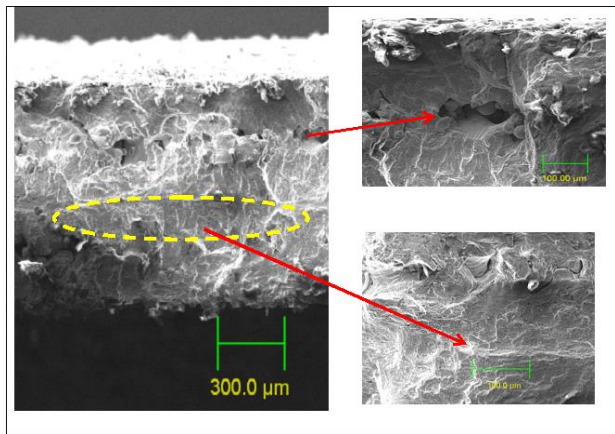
Micrograph of fracture fatigue surfaces at high stress 1350 MPa for SLM part as fabricated ($R_a= 10\mu\text{m}$) to demonstrate different region of fatigue fracture surfaces.
